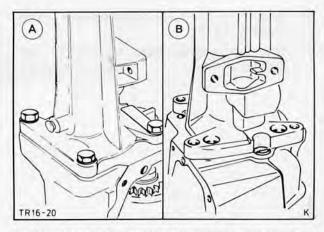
With extension housing bolts removed, turn extension housing until countershaft can be removed
